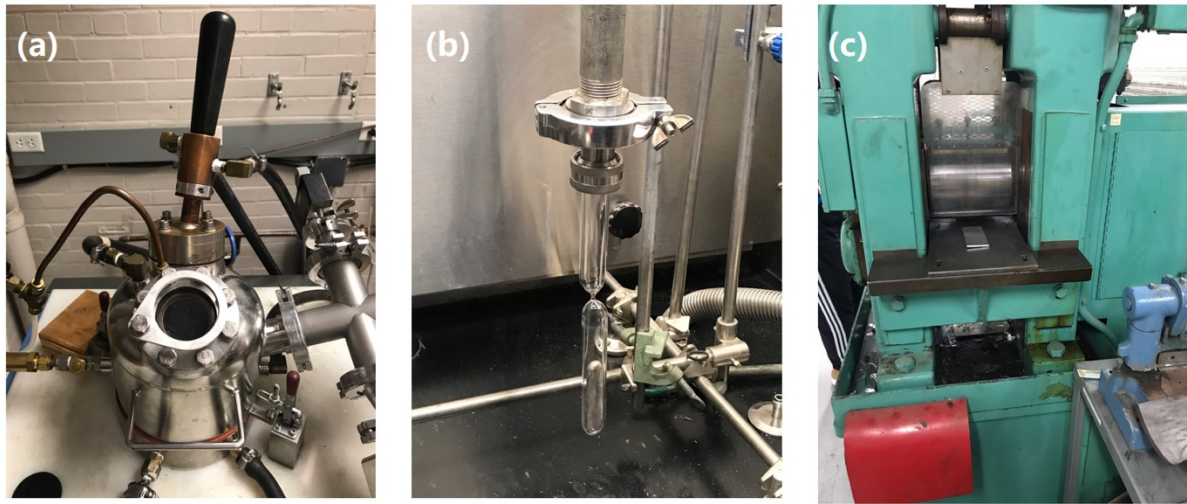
(a) arc melting equipment. (b) vacuum glass tube for sealing. (c) cold roller.
